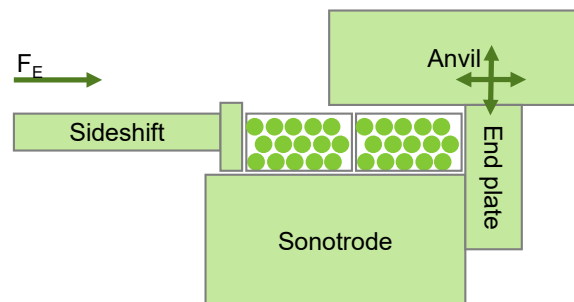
Design of an ultrasonic welding system according to [11]
